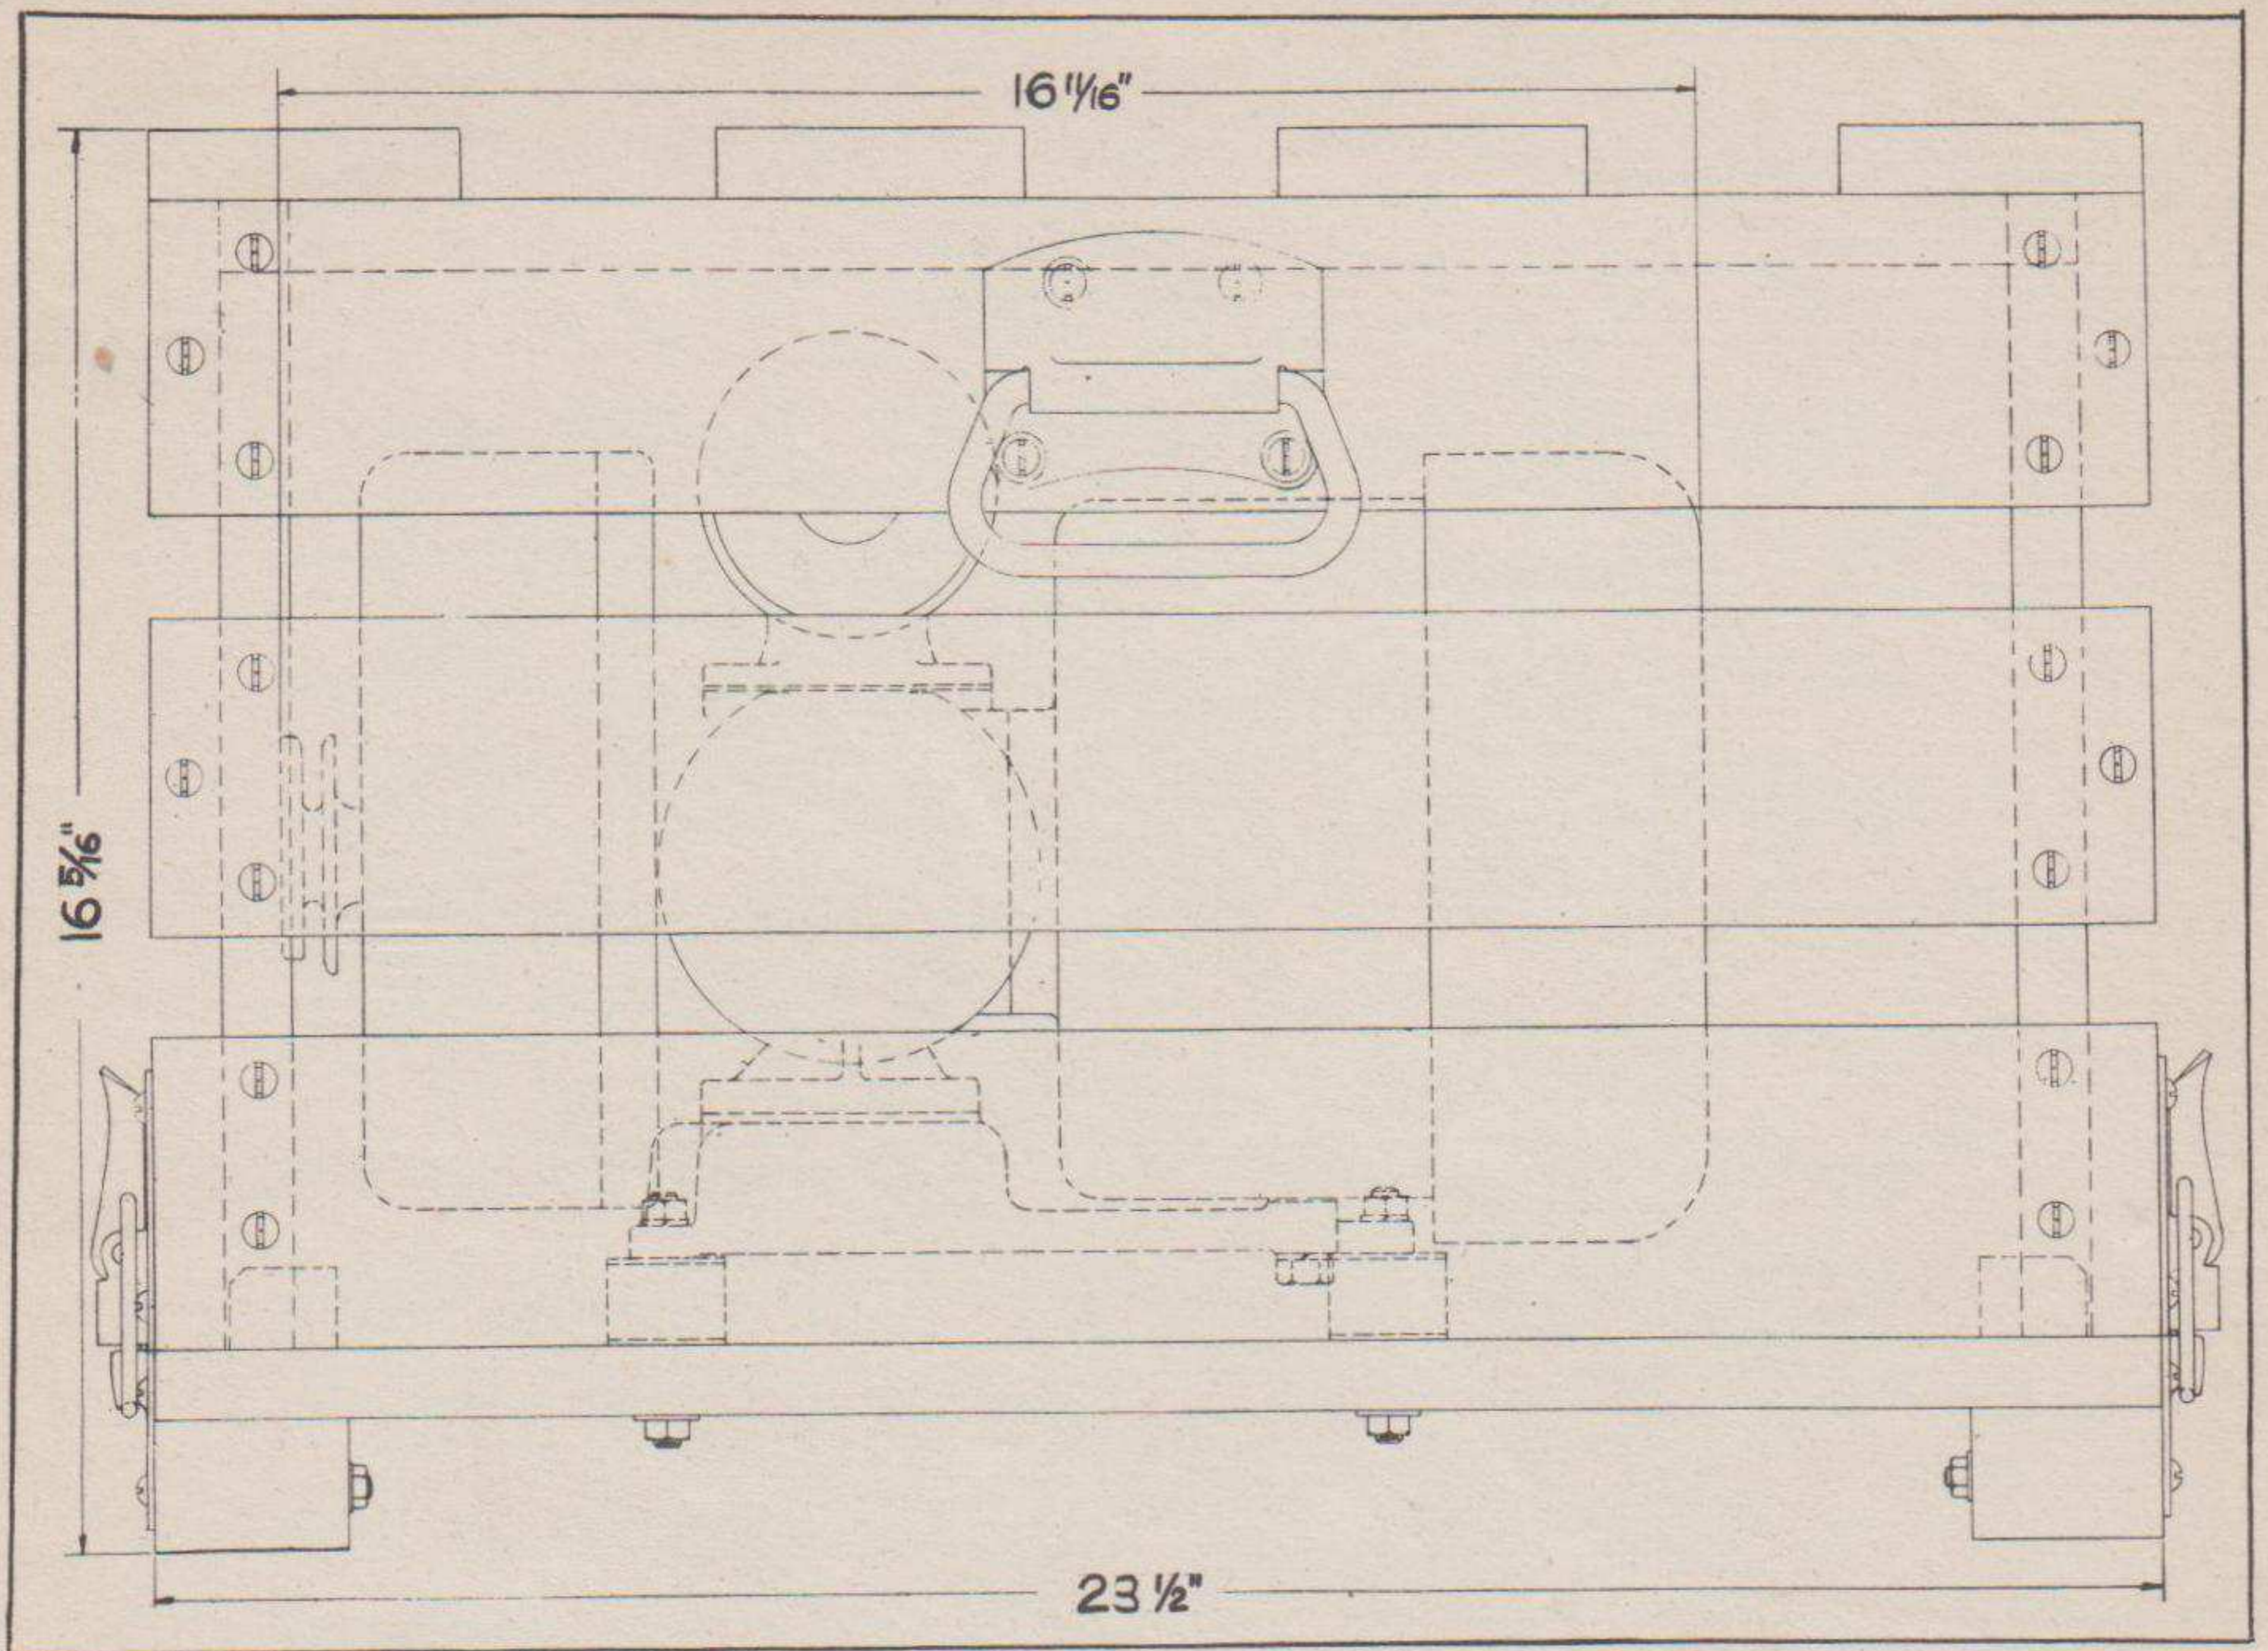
POWER UNIT PE-43-HK OVERALL DIMENSIONS
